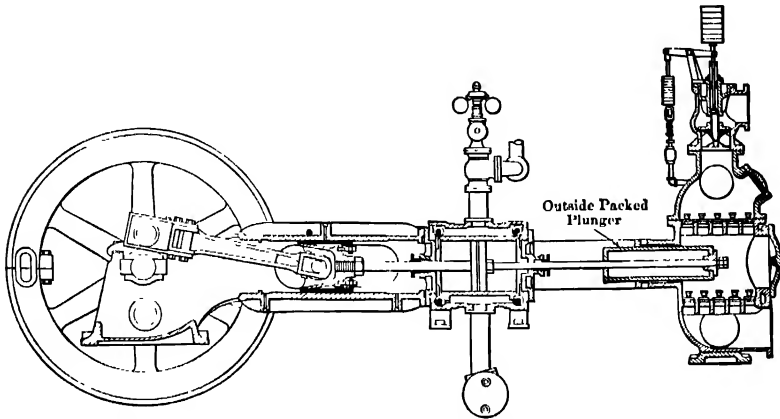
Horizontal Flywheel Pump with Outside-packed Plunger.
